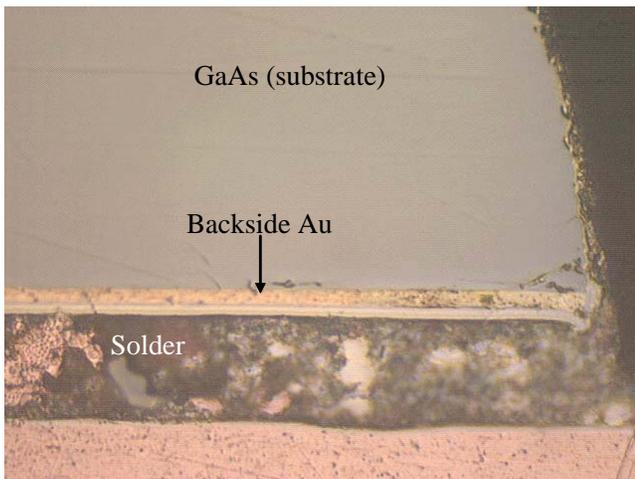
Optical image of die with edge seal process following solder paste assembly. Note that the backside Au (arrow) remains isolated from PbSn solder.
